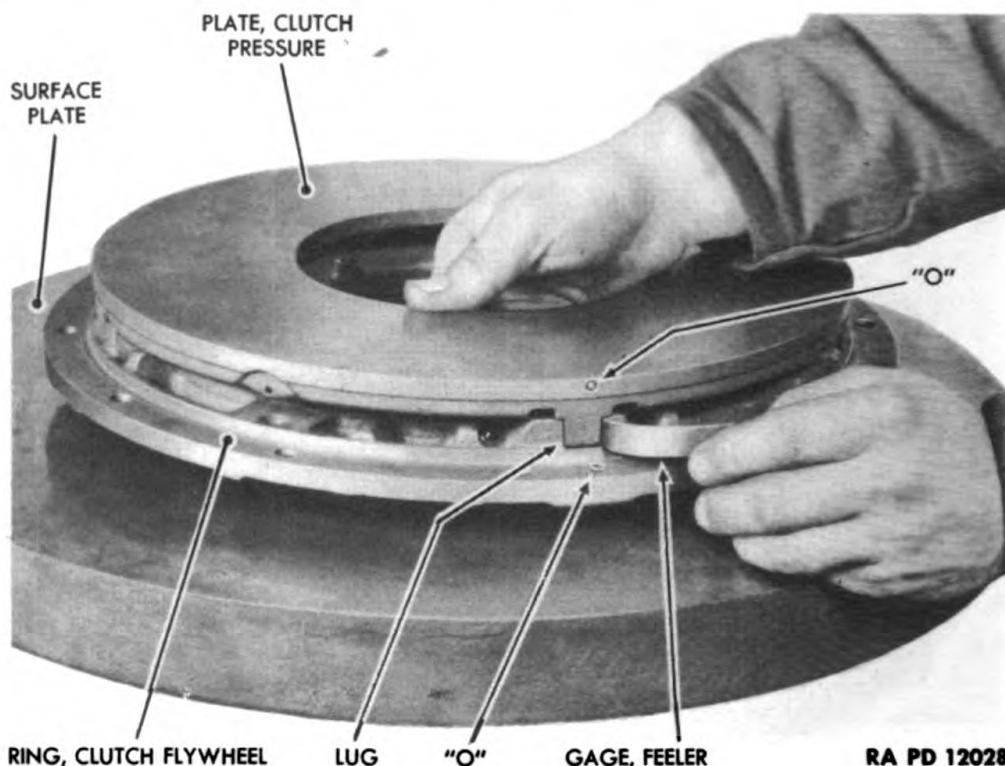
Checking Clutch Flywheel Ring and Pressure Plate for Wear
